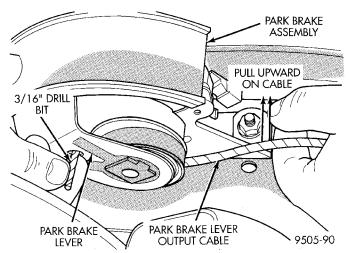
Locking Pin Installed In Park Brake Mechanism
